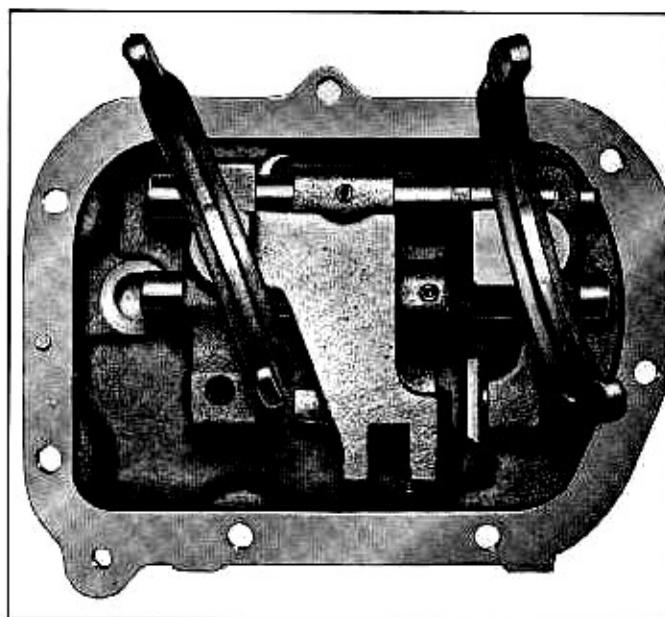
A—Side Cover, Shifter Shafts, Heads and Forks
